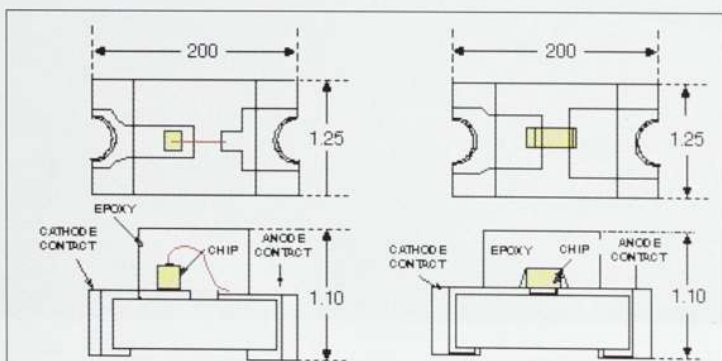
Left - Conventional SMT LED with die attach and wire bond assembly. Right - HP's SMT LED with flip chip die attach and solder assembly.
